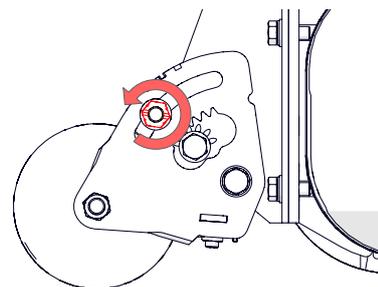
D - Loosen the top clamp nut of the roller quadrant
